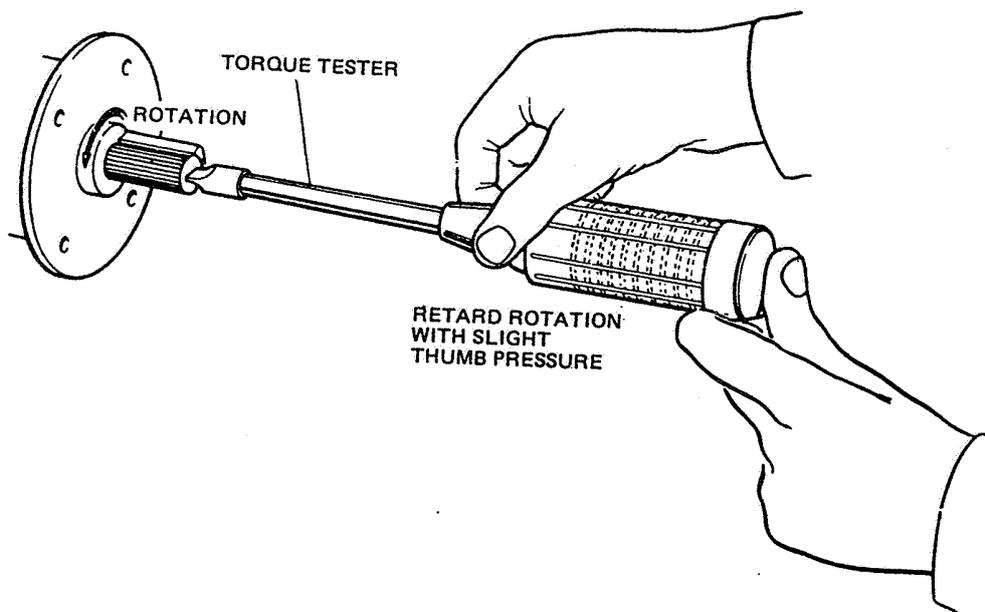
TORQUE TESTING OF SERRATED ROTOR ICE DETECTOR HEAD
